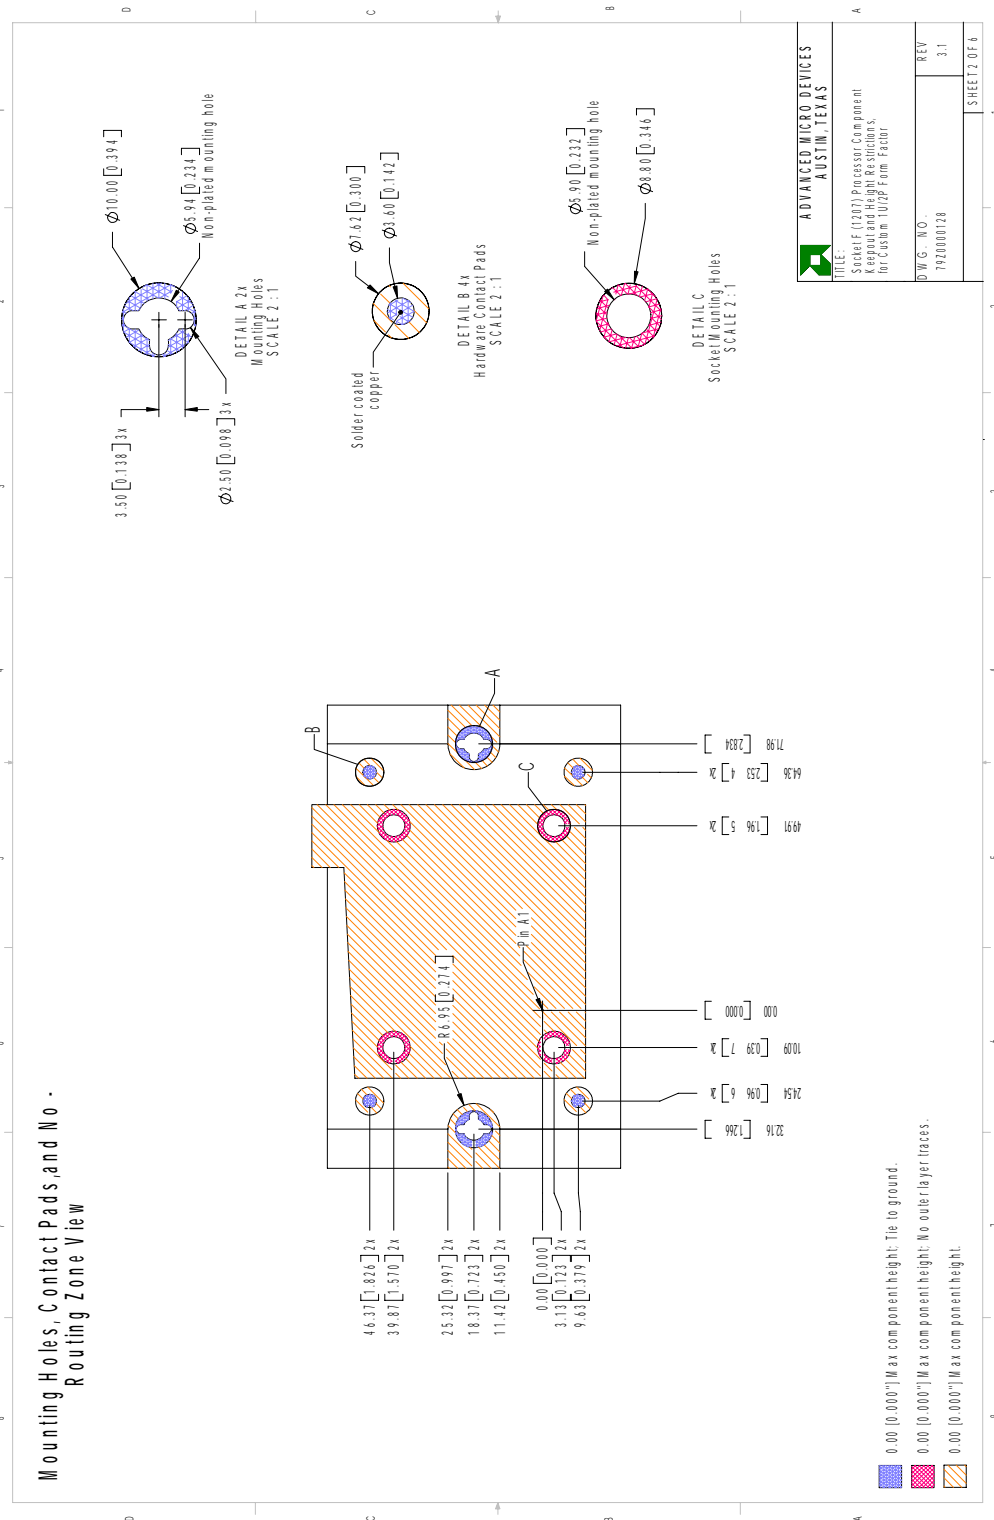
Socket F (1207) 1U-2P Mounting Holes, Contact Pads, and No-Routing Zone
